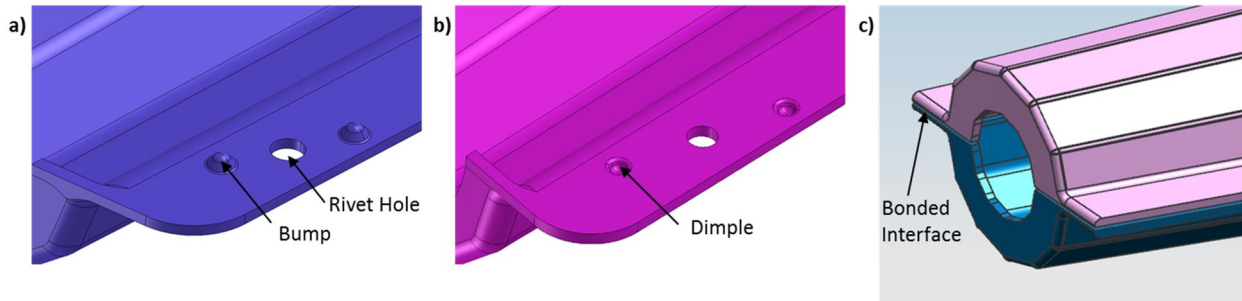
Details of the bonded interface for the crush can halves. a) Zoom-in of half "A" showing the bumps and rivet holes. b) Zoom-in of half "B" showing the receiving dimples and matching rivet holes. c) Schematic of the assembled crush can showing the location of the interface. Rivets are not shown.
